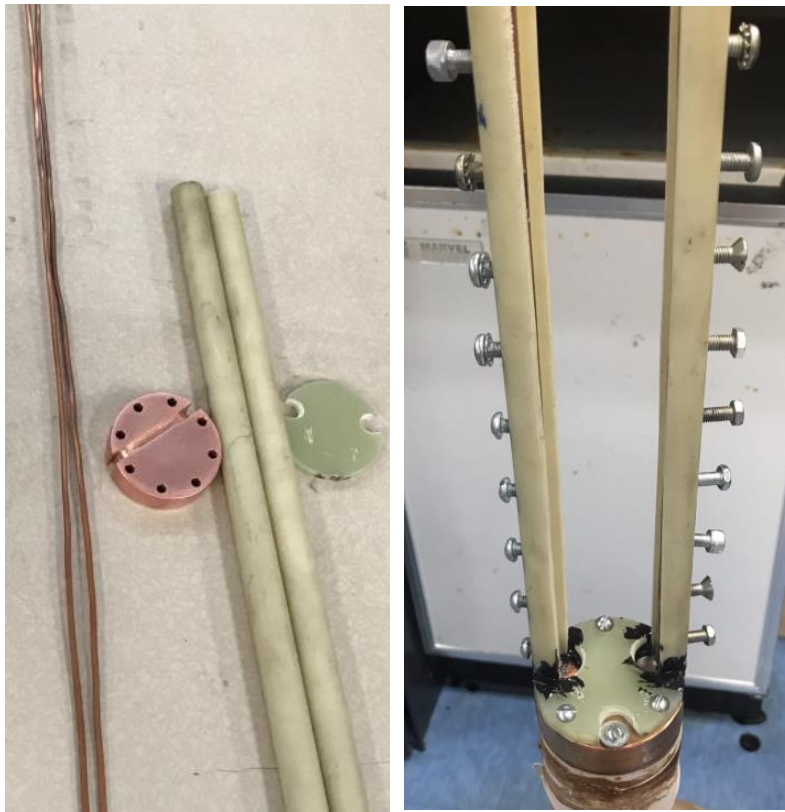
Components used for the test fixture (left) assembled G10 fixture (right)
